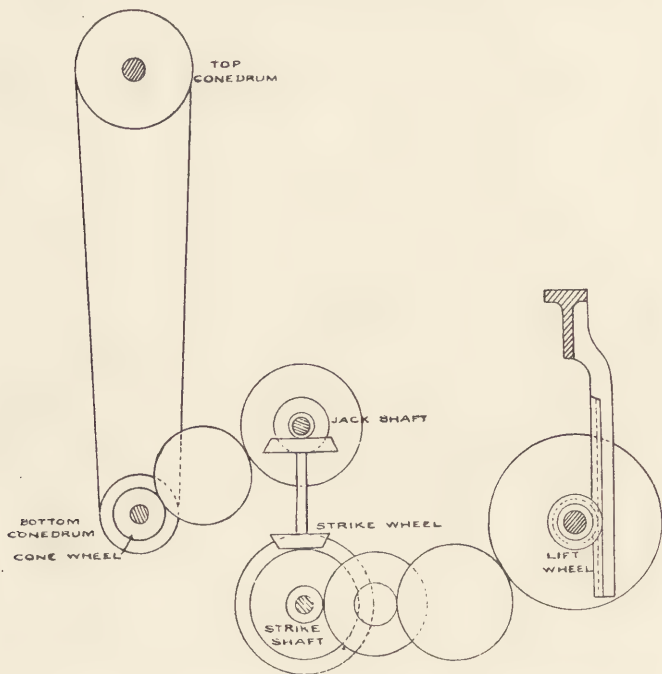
GEARING ARRANGEMENT OF FLY FRAME SHOWING CONNECTIONS BETWEEN CONE DRUM, JACK SHAFT, STRIKE SHAFT, AND LIFTING SHAFT.
